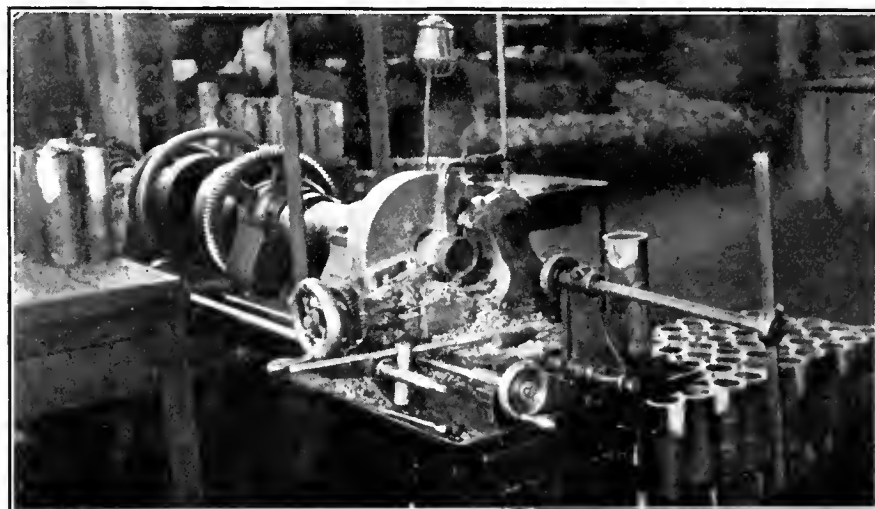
CUTTING OFF OPEN ENDS OF SHELLS ON A "HURLBUT-ROGERS" MACHINE.
